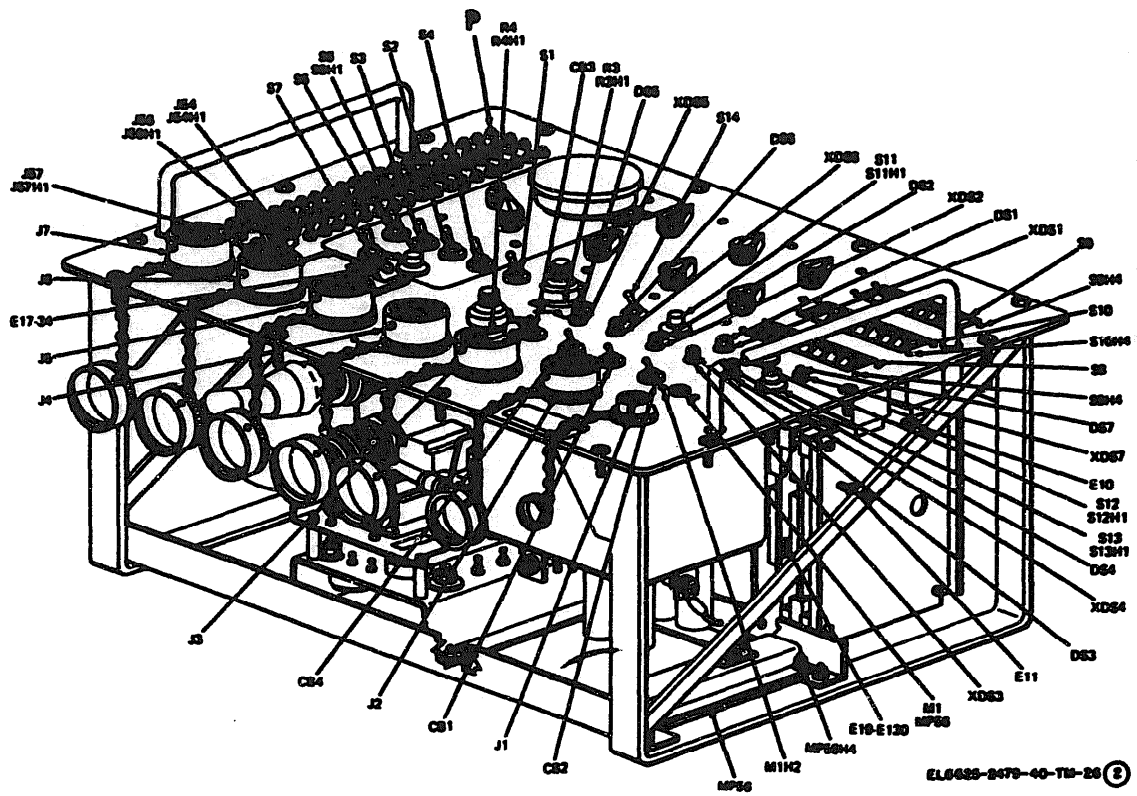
Panel assembly 1A3, parts location (part 2 of 5).
